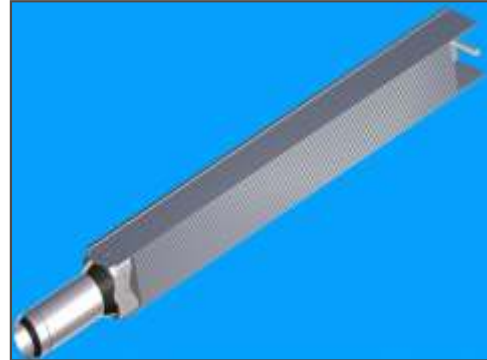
pattern fuel element fabricated at IPEN-CCN.
